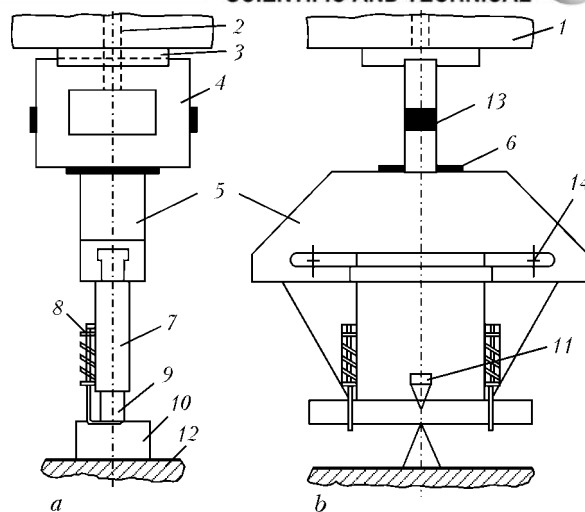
Schematic of fixture for testing specimens by the CTOD procedure: 1 — upper cross-arm; 2 — fixing rod; 3 — bearing foot; 4 — load-bearing clamp; 5 — clip with movable bearings; 6 — heat insulating gasket; 8 — hold-down; 9 — specimen; 10 — fixed bearing; 11 — COD sensor; 12 — testing machine platform; 13 — load sensor; 14 — retainer
